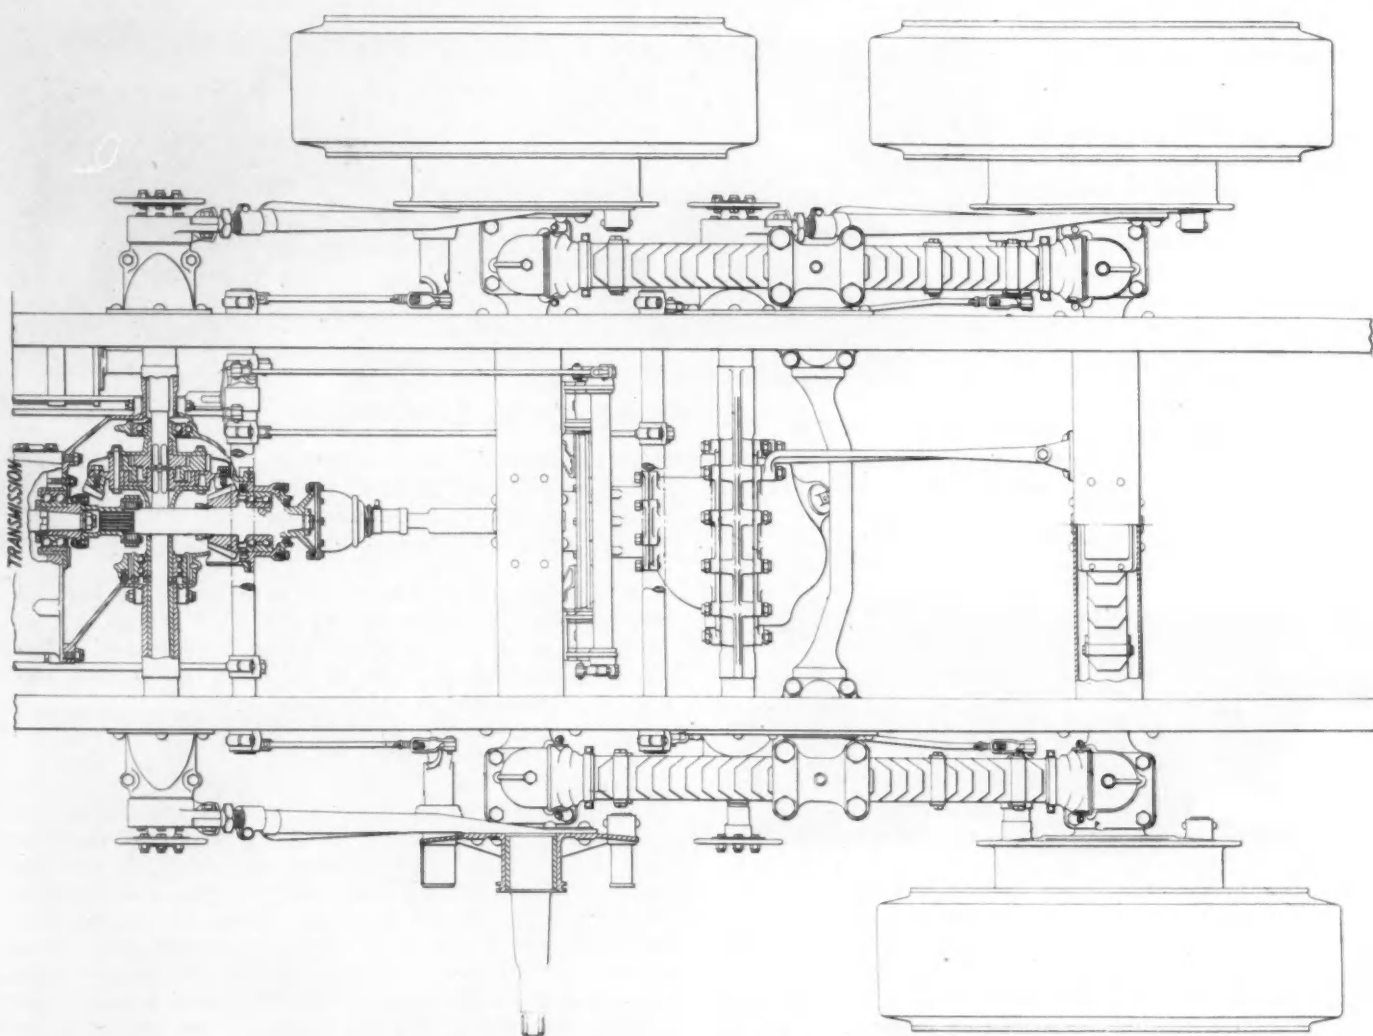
CHAIN-DRIVE CONSTRUCTION OF MACK SIX-WHEEL CHASSIS
